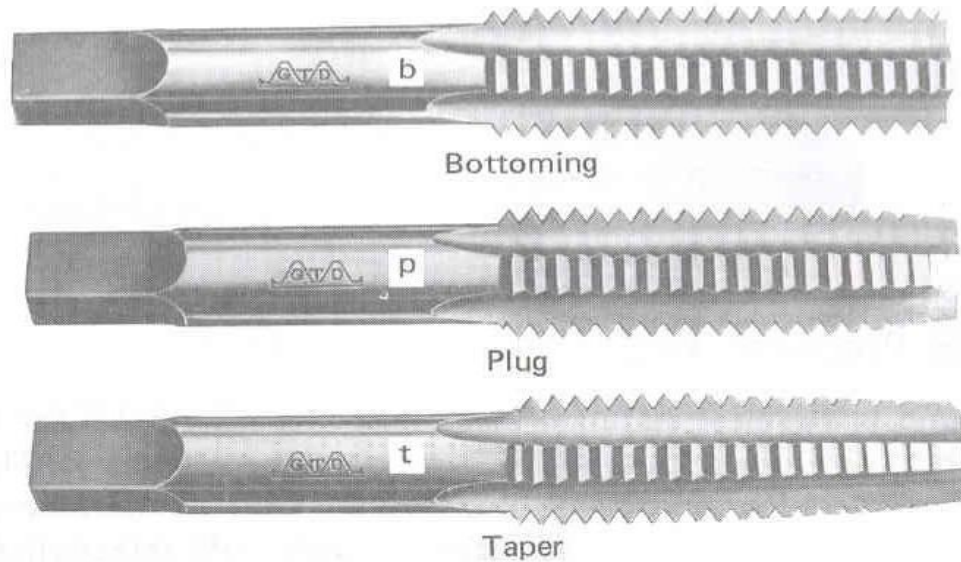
terminology for a plug tap with photographs of taper (t), plug (p), and bottoming (b) taps are used serially in threading holes.
